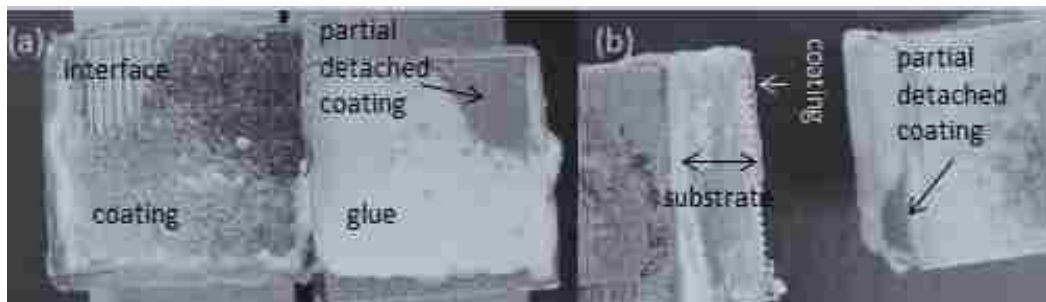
Cohesive failure surface of PTWA-A coating (a) Top view of the failed surface showing the failure on PTWA-A coating, (b) side view of the partial detachment of the PTWA-A coating from the substrate
